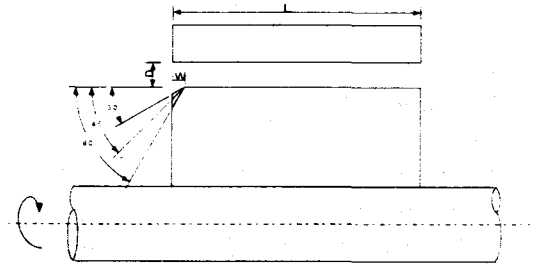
Geometry of rotating discharge hole: chamfered inlet
